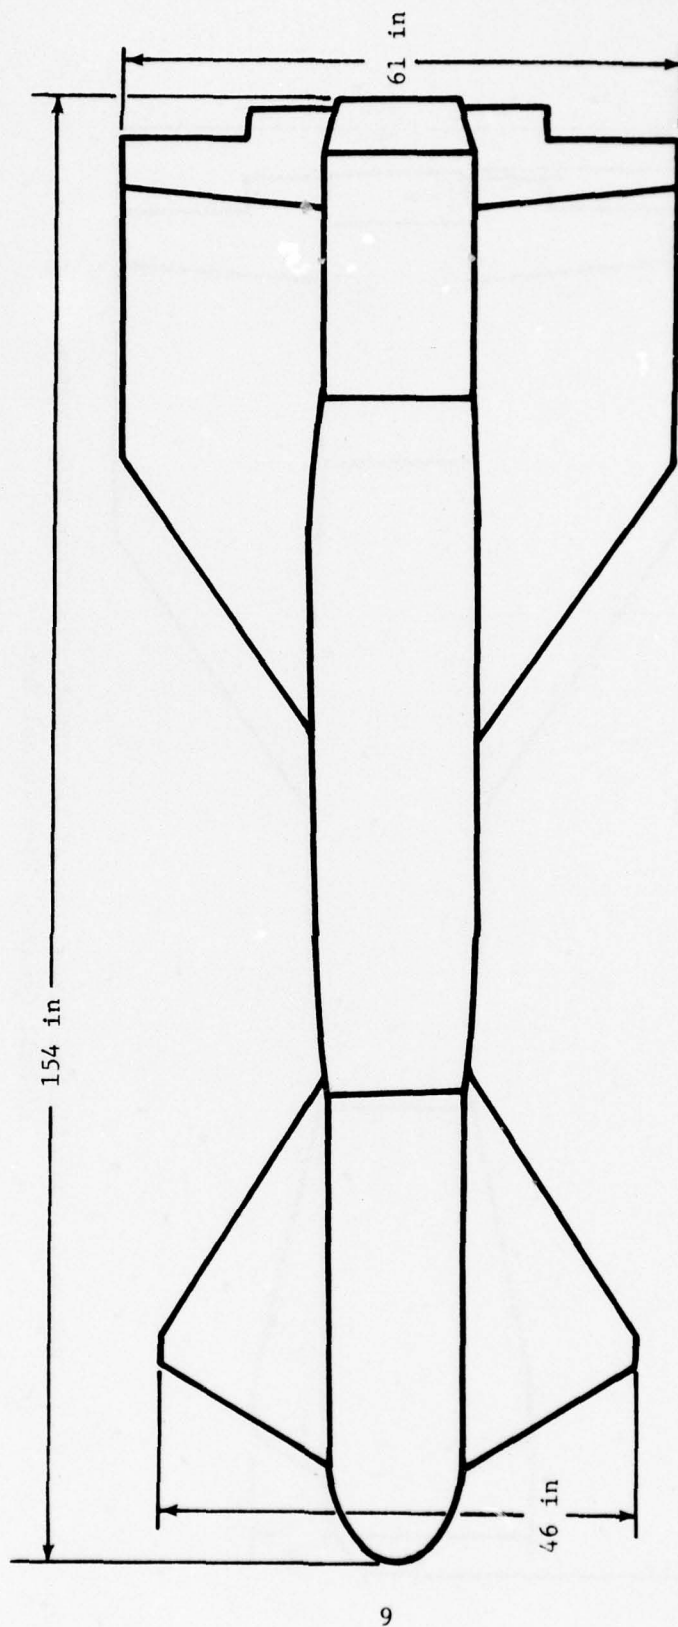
Details and Dimensions of the GBU-15 Cruciform Wing Weapon
